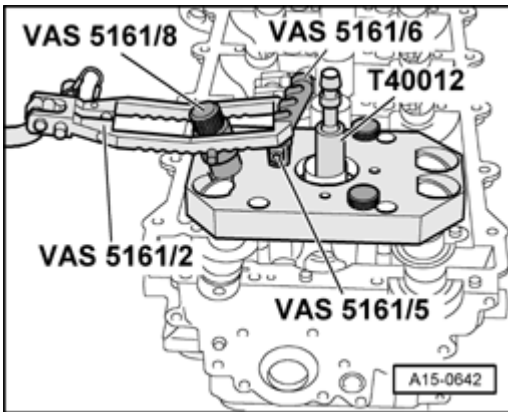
Installing Engaging Device VAS 5161/6 With Installation Forks VAS 5161/5 Into Guide Plate VAS 5161/7
